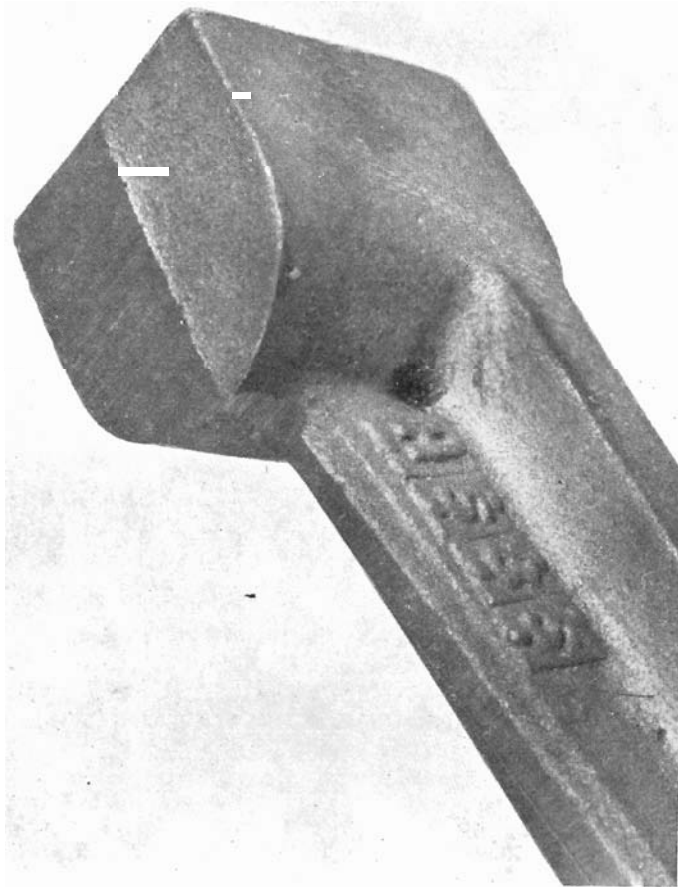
Surface shrinkage in a grey-iron casting.
